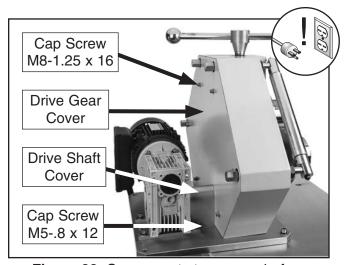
Components to remove before lubricating leadscrew and drive gears.
